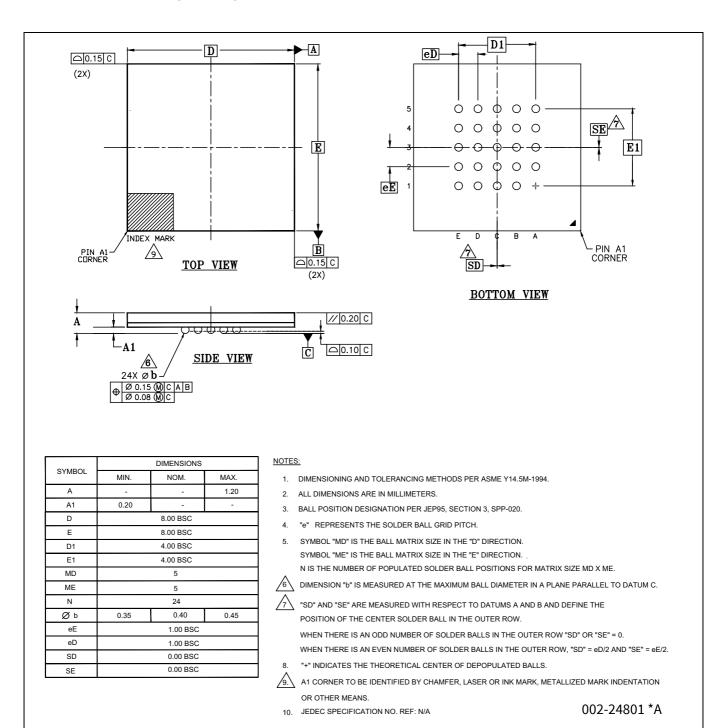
24-ball BGA (8 × 8 × 1.2 mm) package outline, 002-24801
